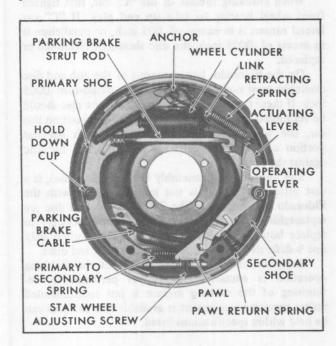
Rear Wheel Drum Brake Mechanism
